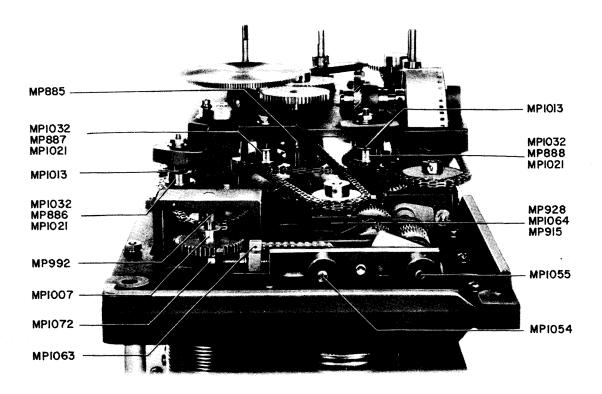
Tuning and Coupling Mechanism, Location of Parts Visible from the Top
